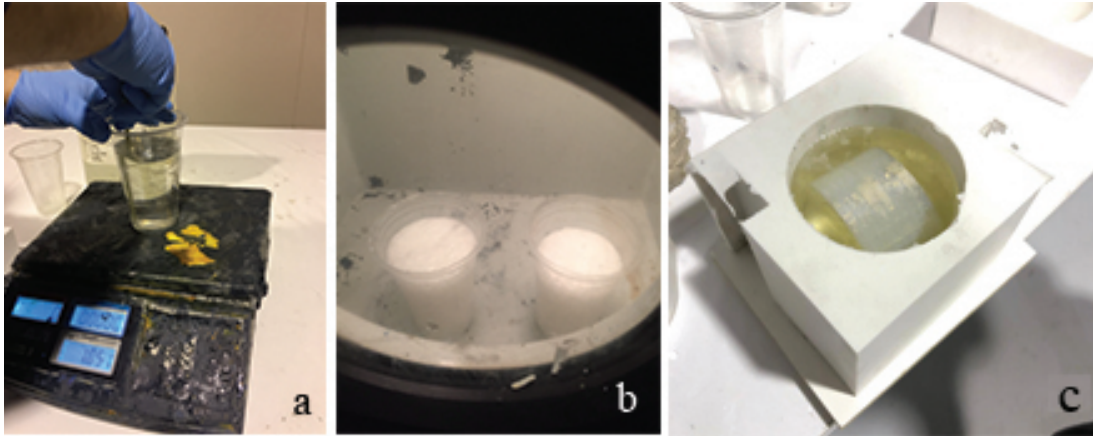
Molding phases: a) mixing epoxy with the required amount of dryer, b) vacuuming air to ensure a smooth inner surface, c) epoxy being poured around the 3D printed inner structure and left to dry.
